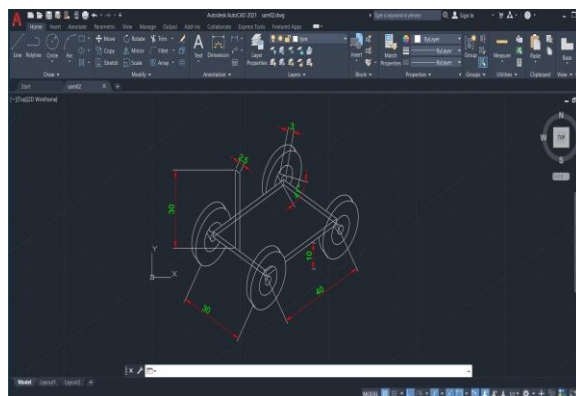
Cad Drawing of Multipurpose agricultural bot
